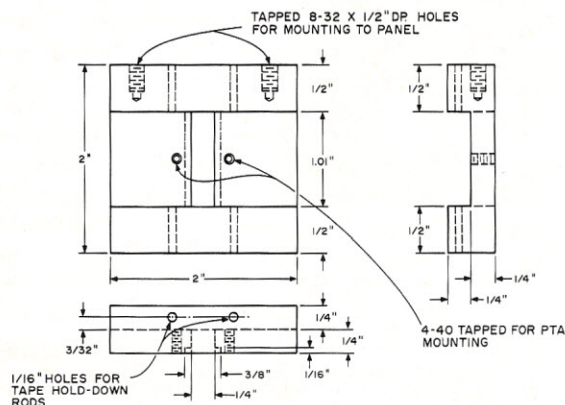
Phototransistor array (PTA) holder and paper tape guide channel.
